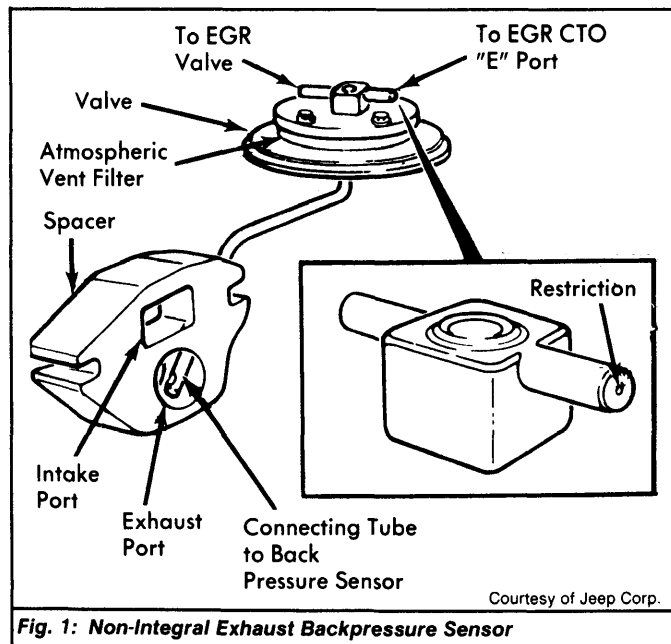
Non-Integral Exhaust Backpressure Sensor
